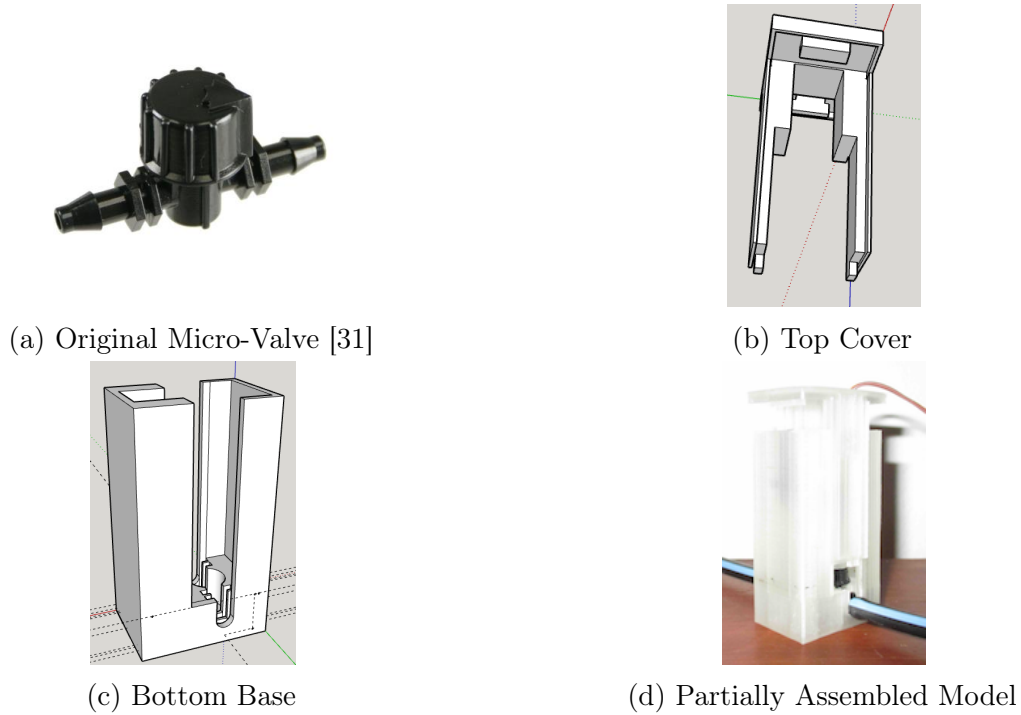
Modular Design of the Micro Enclosure Drawings and Assembled Model with Motor Attachment and Drip Tubes
